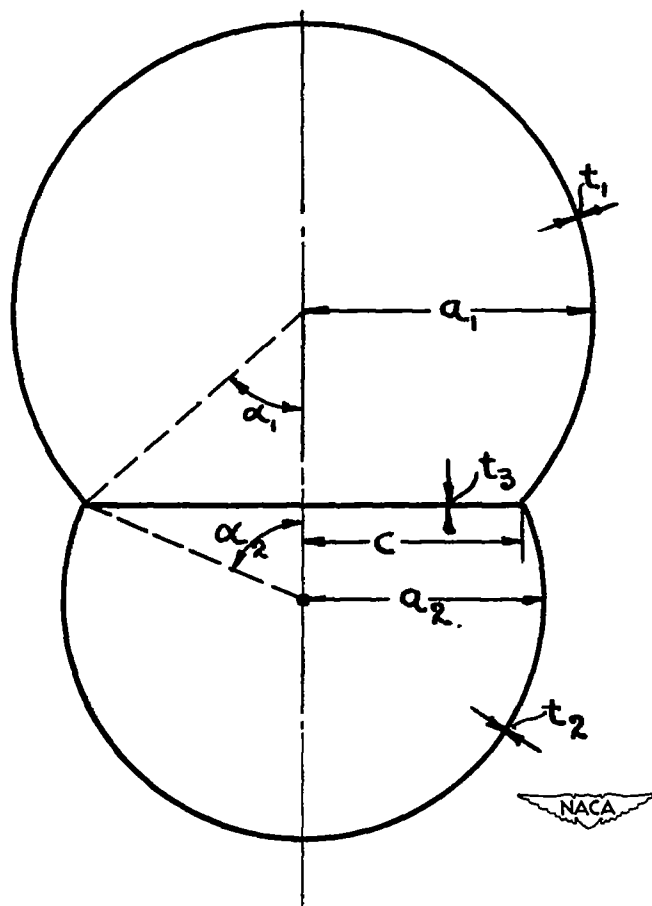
Cross section through a pressurized cabin consisting of two cylindrical shells.
